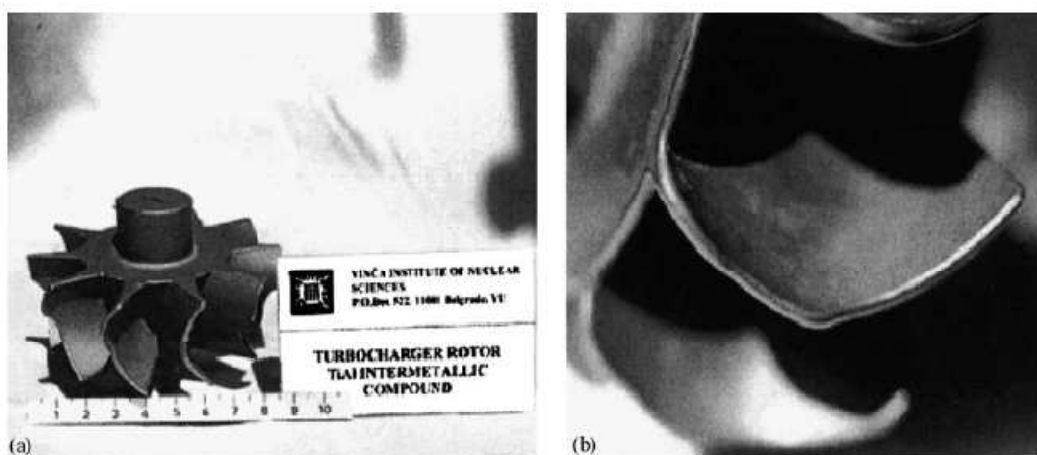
Correctly cast turbocharger wheel and assembly of specimens for tensile testing a) general look of wheel b) detail showing blade edge [52]
